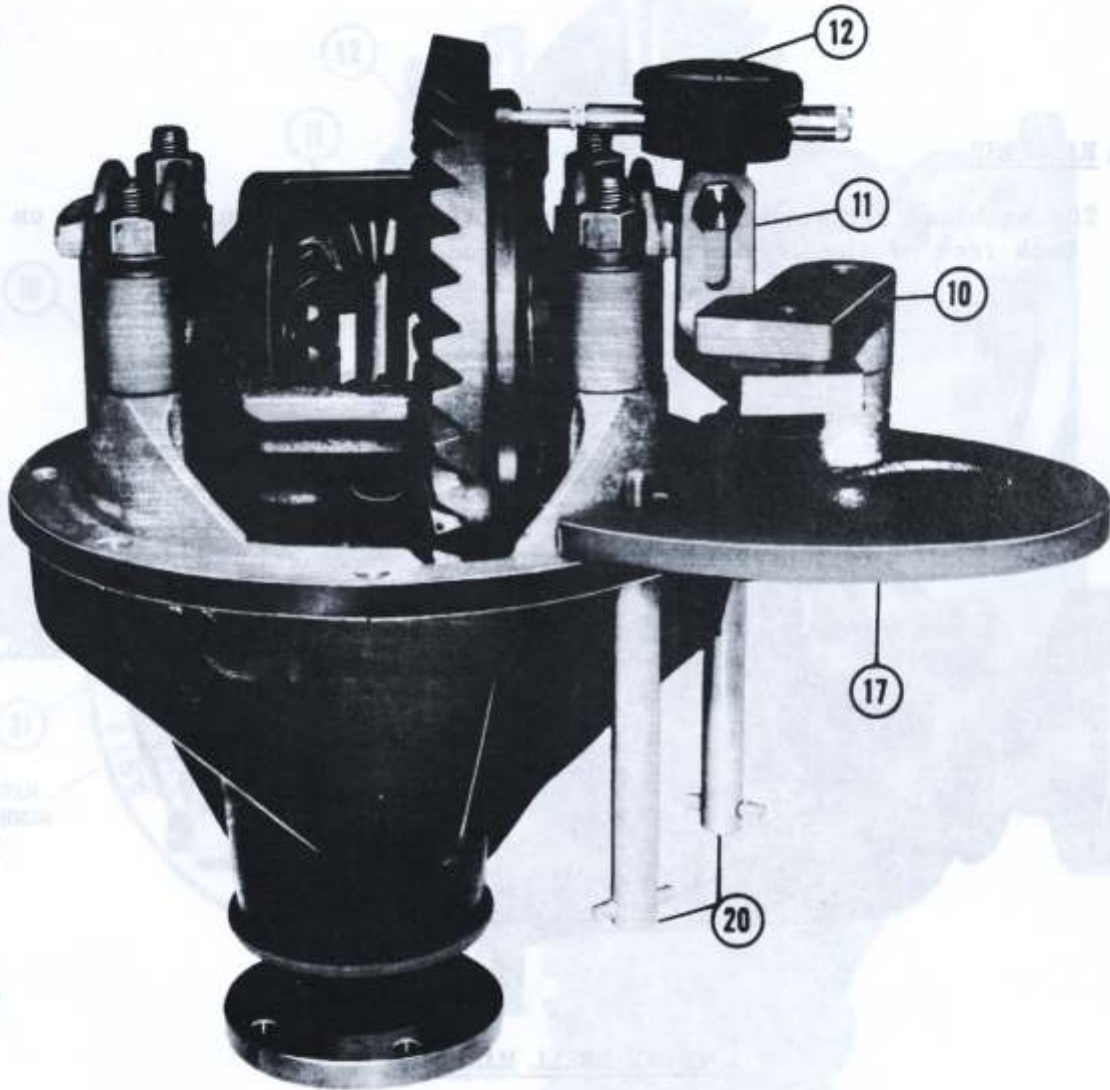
CHECKING CROWN WHEEL RUN-OUT
